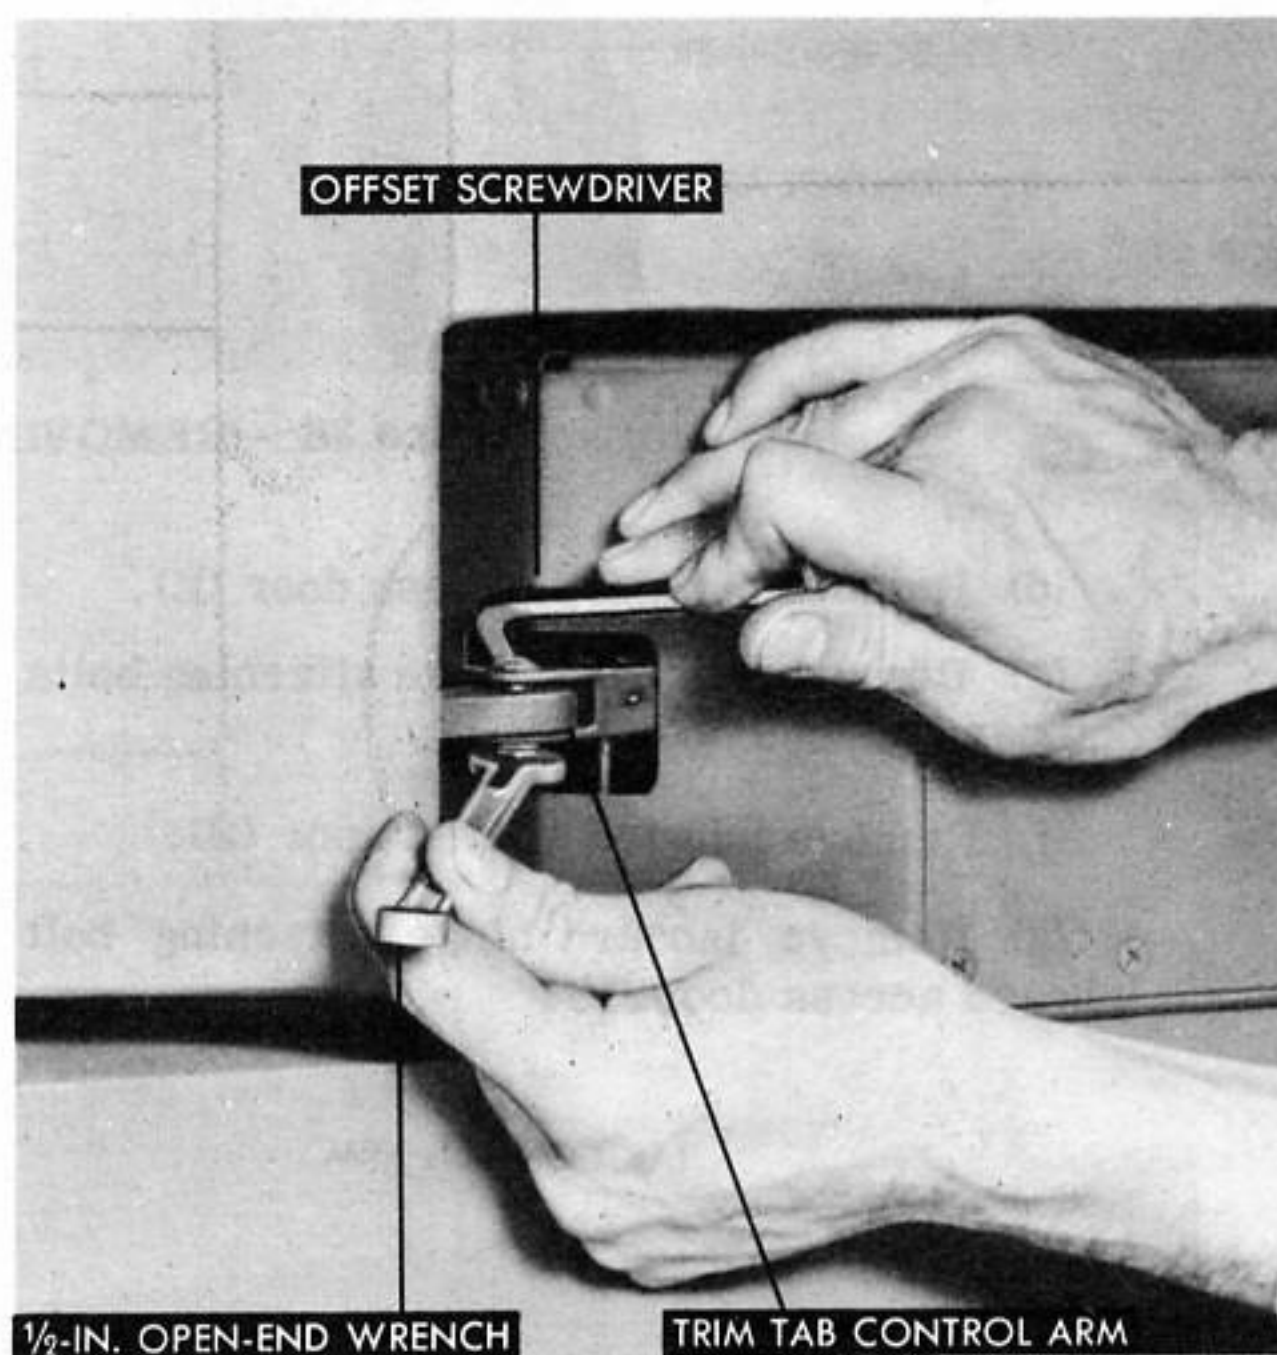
DISCONNECTING TRIM TAB CONTROL ARM FOR RUDDER REMOVAL
